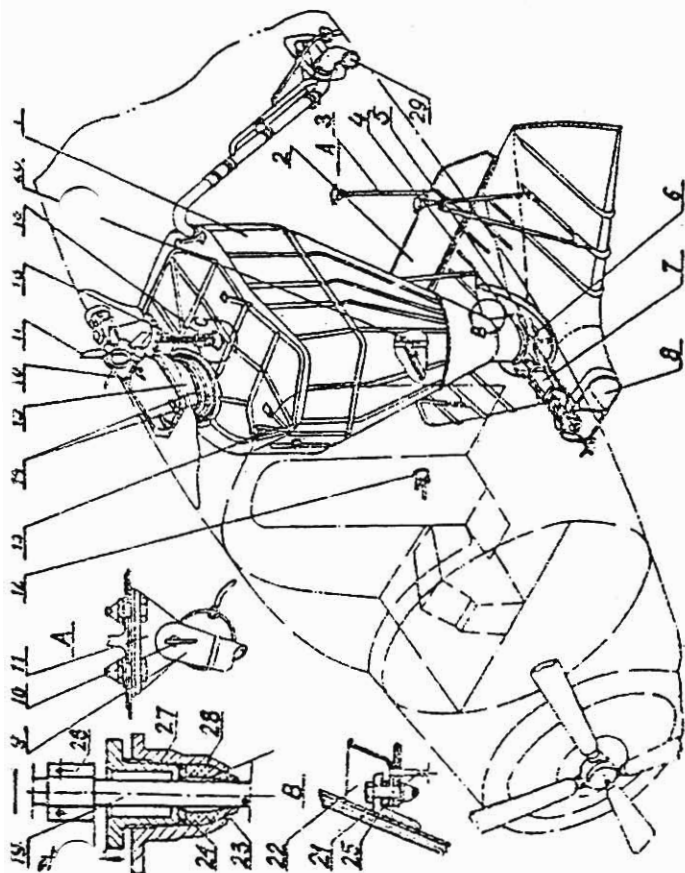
Positioning Dusting Equipment RTSZ-IM on Airplane.
